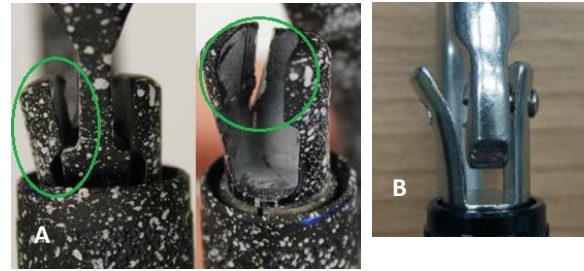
Damaged gate arm of A – HMS, B – OVO
